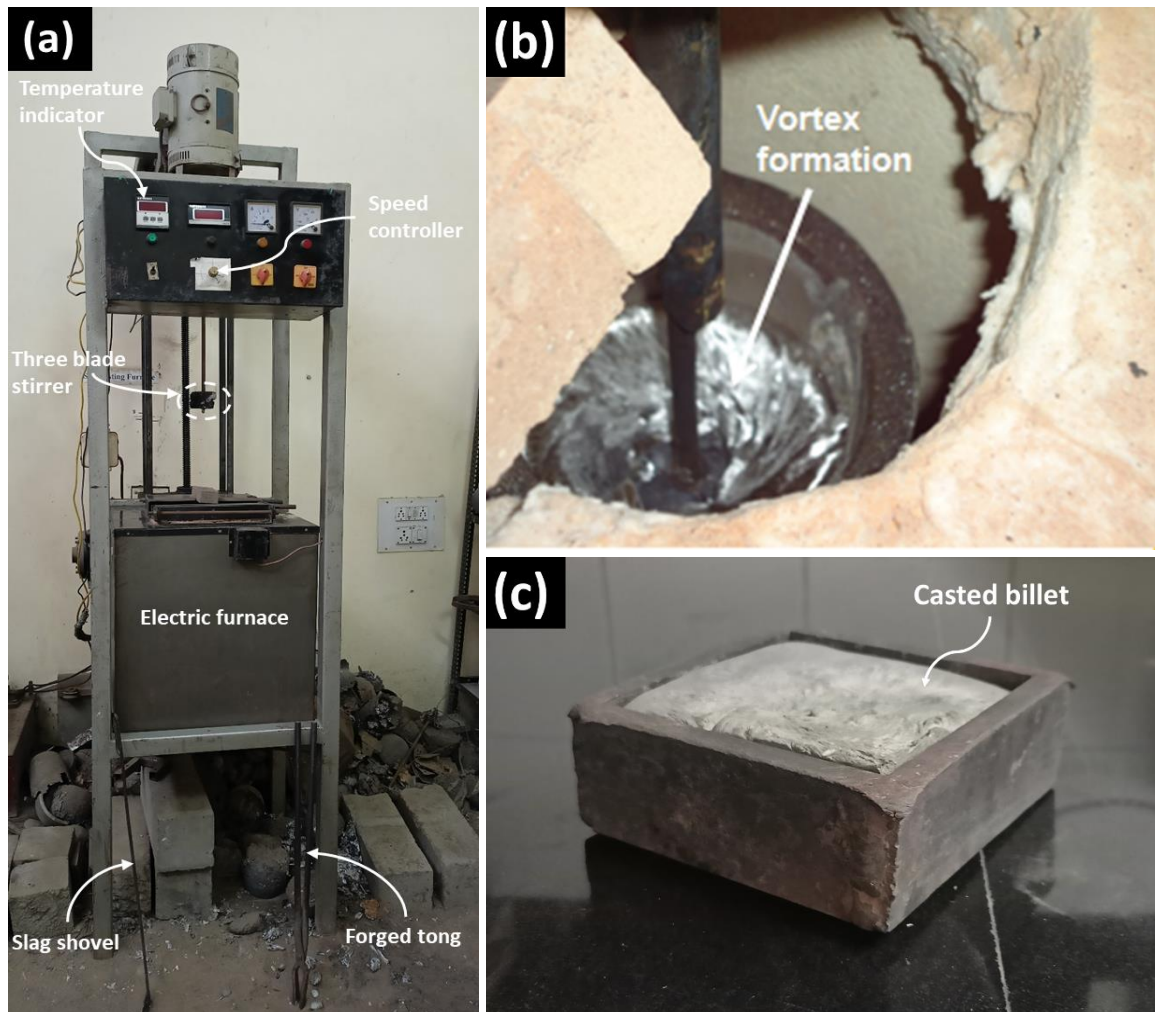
(a) Stir casting set-up, (b) vortex generated by the three blade stirrer, and (c) solidified billet after the casting process (Courtesy: Thapar Institute of Engineering and Technology, Patiala).
